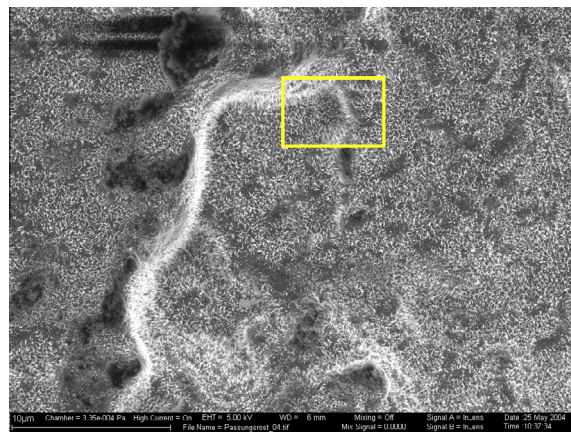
Part of the fatigue fracture surface of an original fatigue crack, see crack surface (c) in Fig. 14. The crack surface is coated with small iron oxide whiskers.
